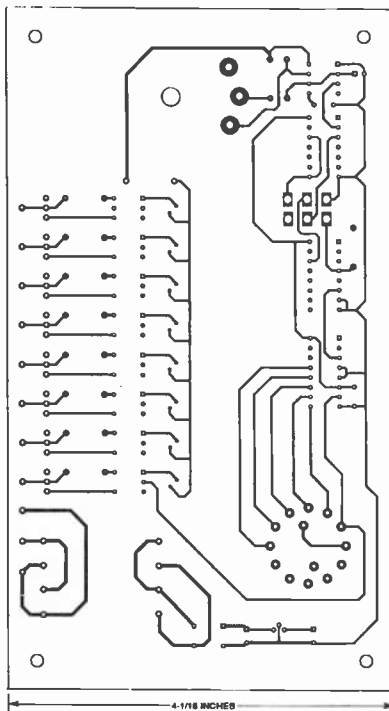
This is the solder side of the Light Animator PC board, reduced by 50%.
